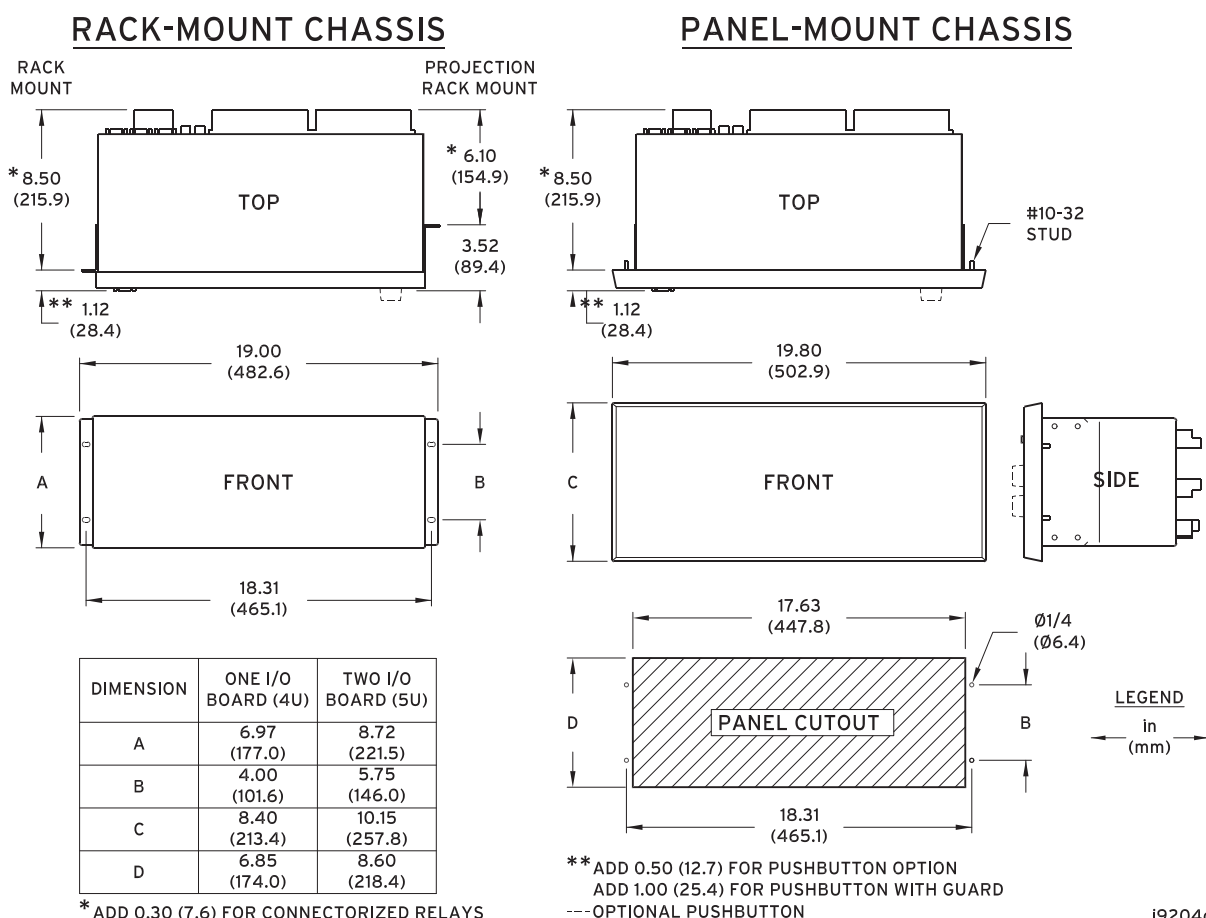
Dimensions for Rack- and Panel-Mount Models (Horizontal Mounting Shown; Dimensions Also Apply to Vertical Mounting)
